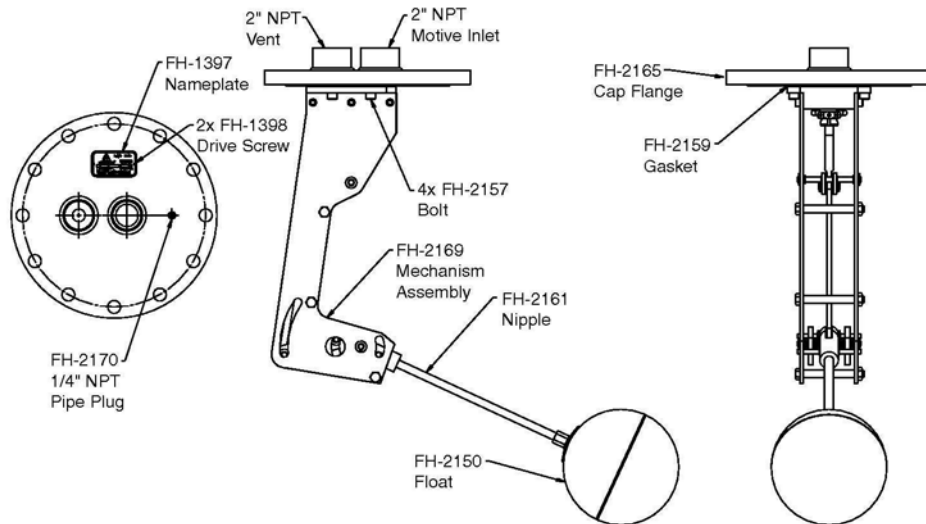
EPT-516 Pumping Trap Cap Assembly
